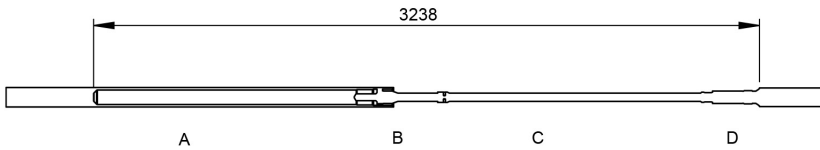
Flow path across shut-in valve. Dimensions in millimeter [mm].
